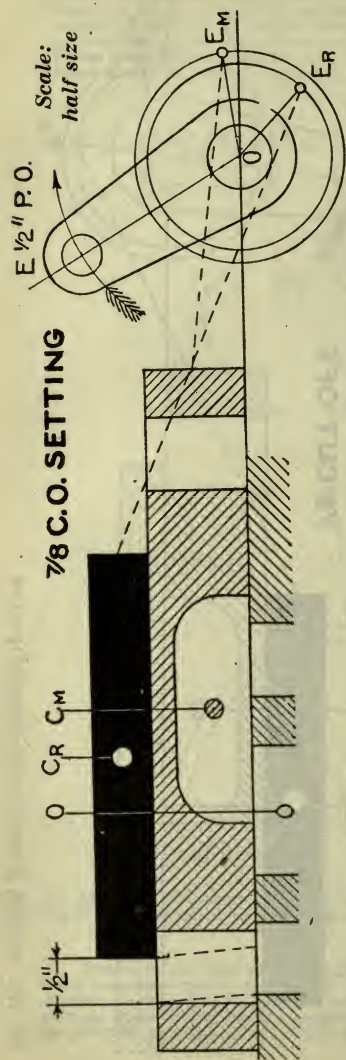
Positions of valves, crank, and eccentrics, for $\frac{1}{2}$ in. port opening of the riding valve with $\frac{1}{8}$ cut off setting of the riding eccentric.
